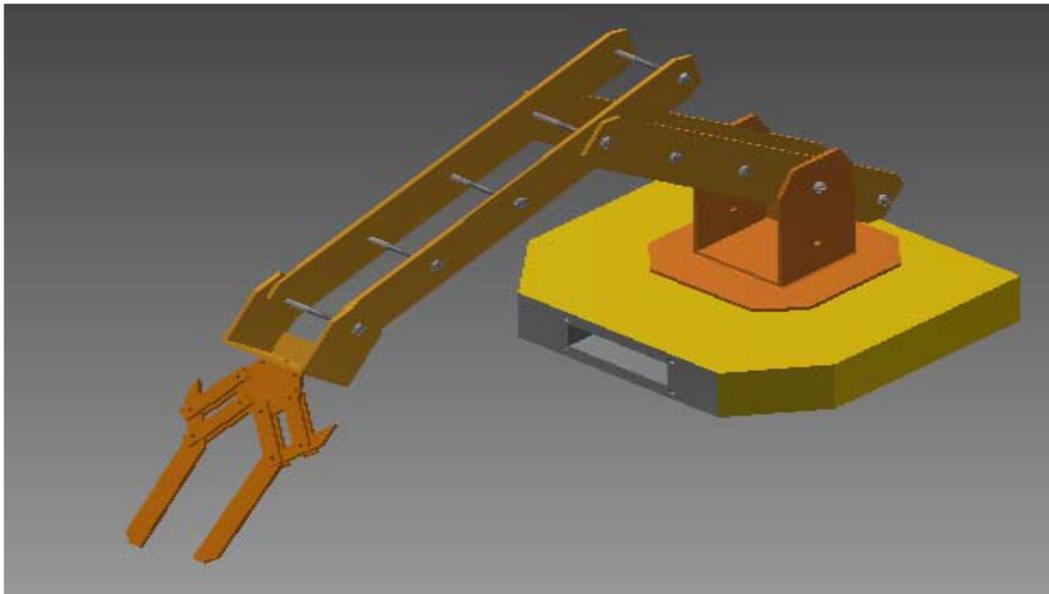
CAD of complete mechanical structure of the robotic arm drawn in Autodesk Inventor.
